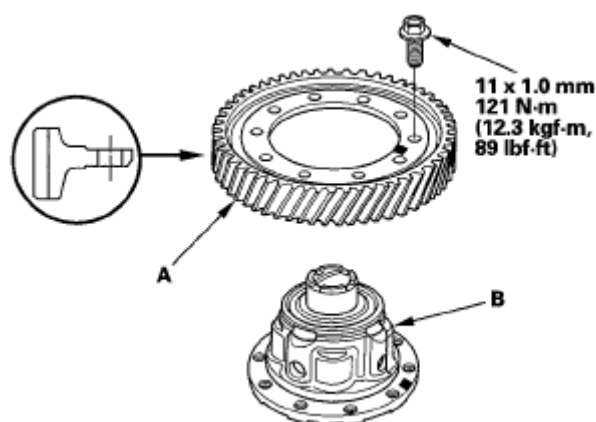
Identifying Final Driven Gear, Differential Carrier & Torque Spec.
